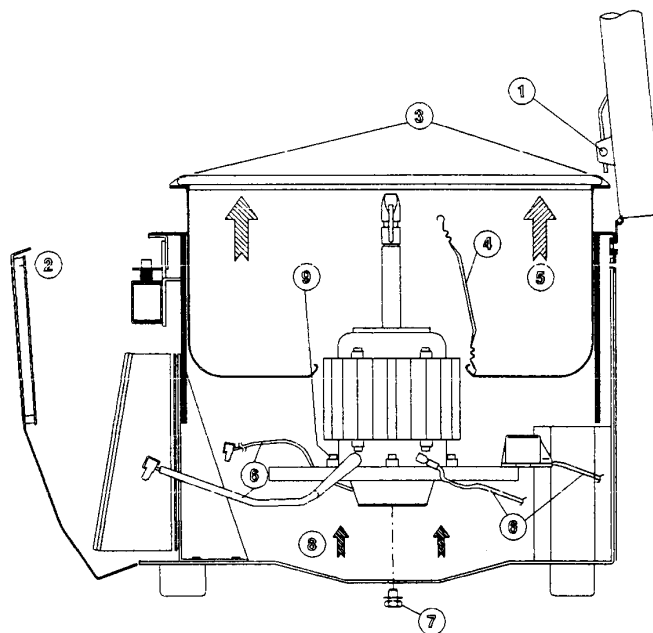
DISMOUNTING THE MOTOR OF THE C3i
